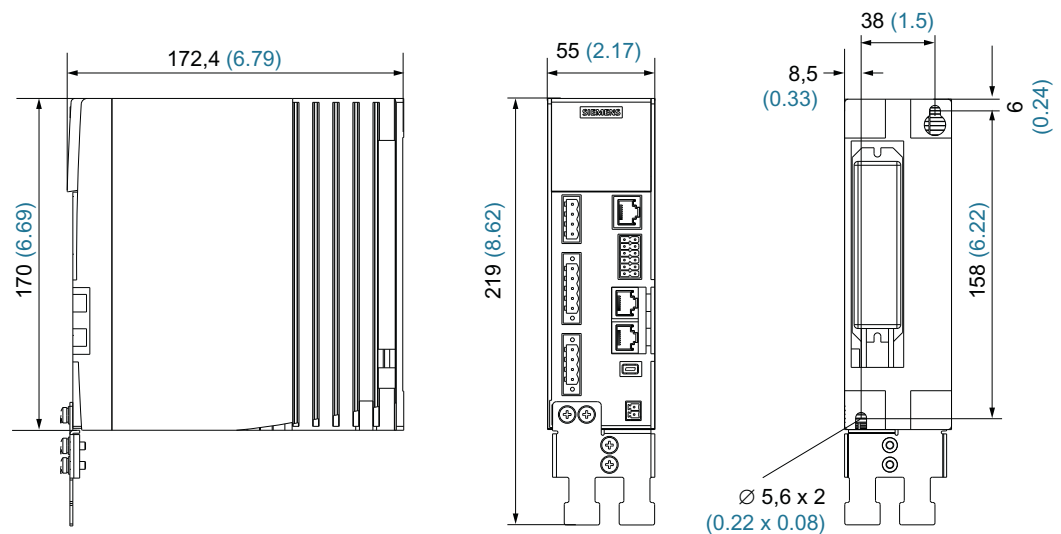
Dimension drawing SINAMICS S210 FSB, 1 AC, dimensions in mm (inch)
